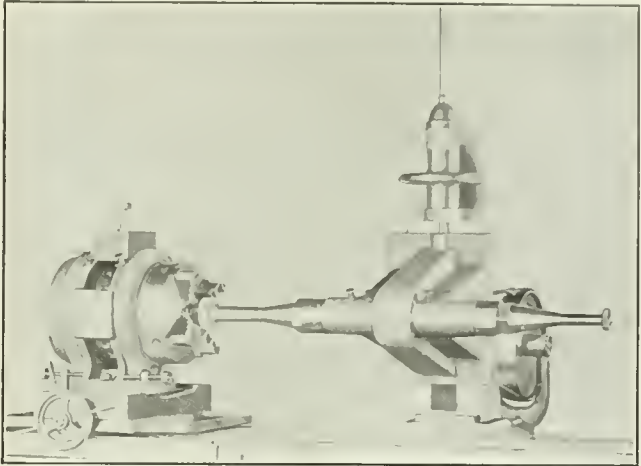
Headstock Reversed for Grinding from Front End of Hole
